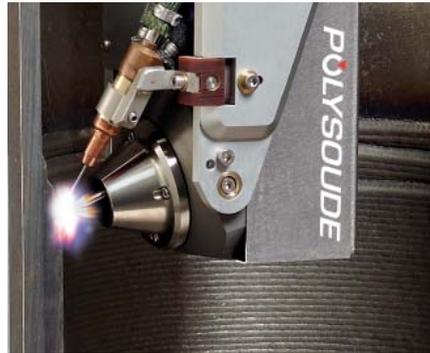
Cladding a vertical wall with the TIG^{er} technology
